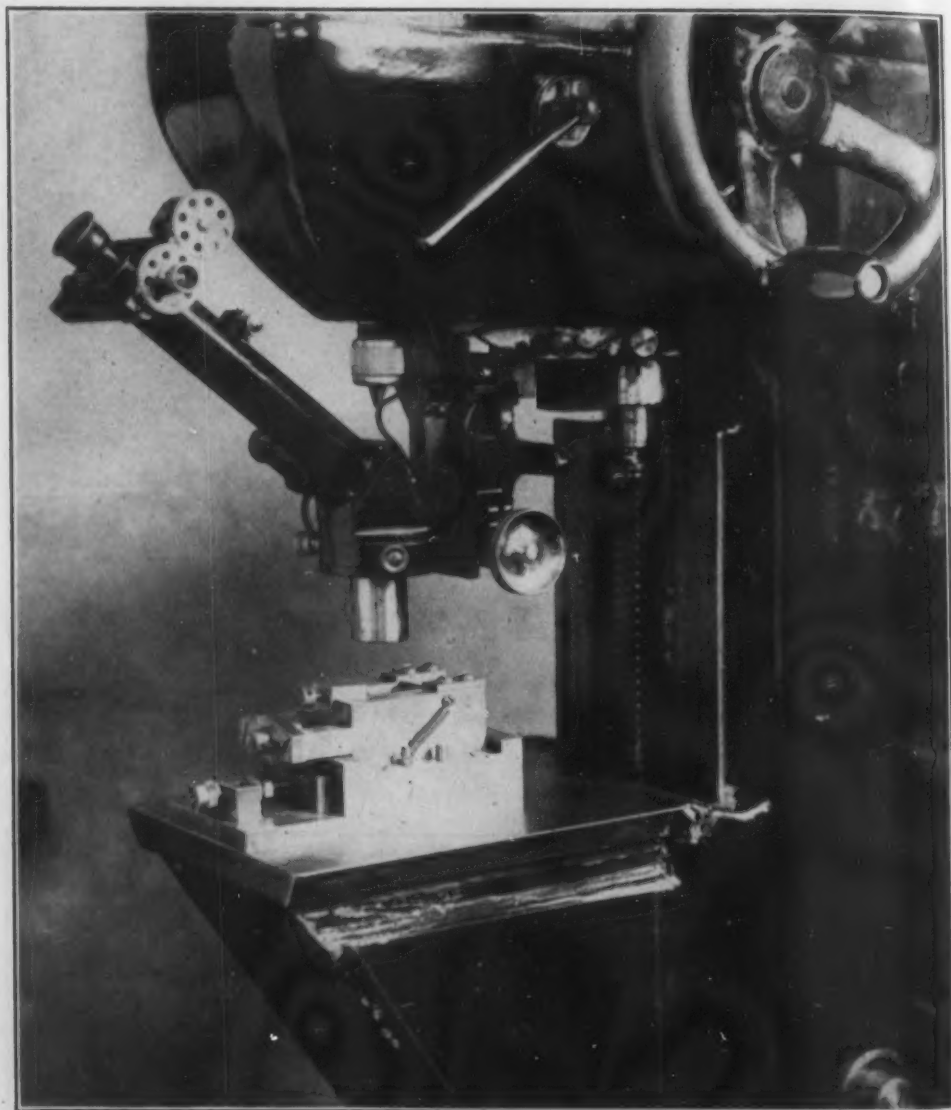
Close-up Photograph of Testing Table of the Vickers Hardness Tester with Specimen Fixture in Position.
